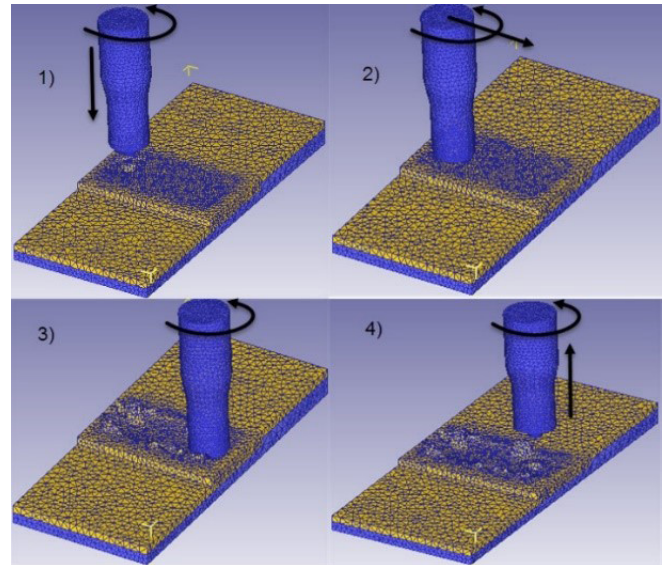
Friction stir lap welding steps in DEFORM
